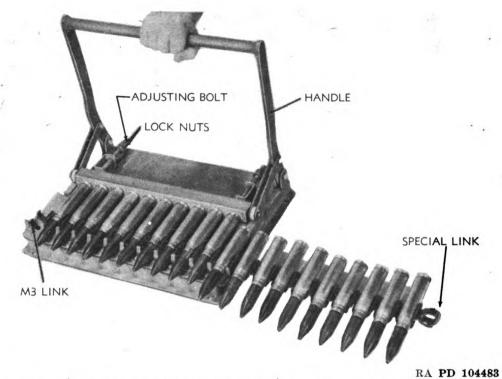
Belting ammunition for feed mechanism M3 using 20-mm linking machine M4.
